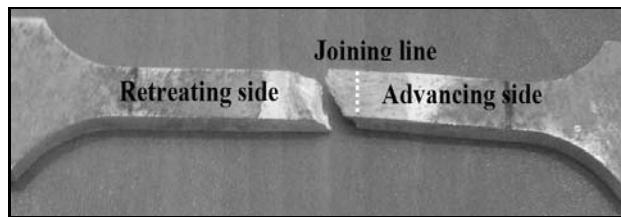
The macrographs of the fractured sample at the 1964 rpm and  $20 \text{ mm min}^{-1}$  conditions welded sample.
